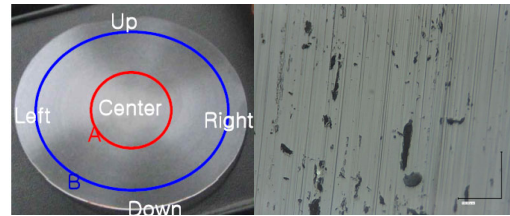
Pictures of workpiece and magnified ground surface by microscope using #1200 grinding wheel
